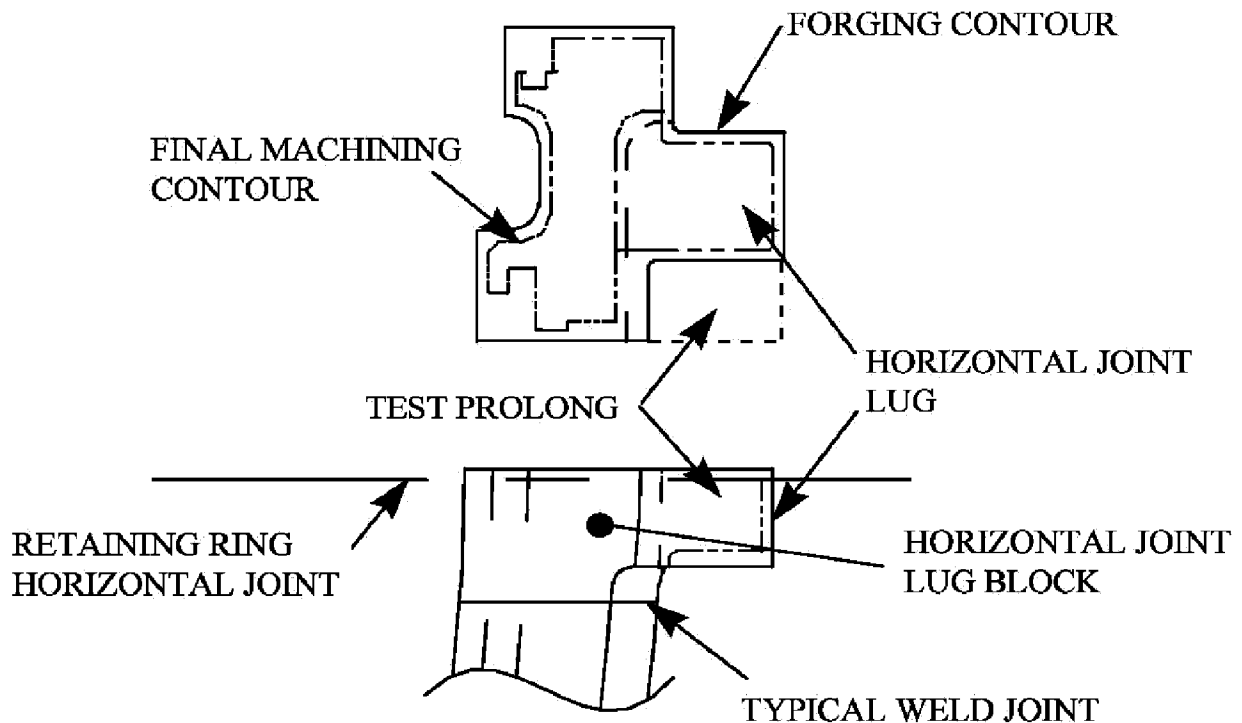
RETAINING RING HORIZONTAL JOINT BLOCK LUG
